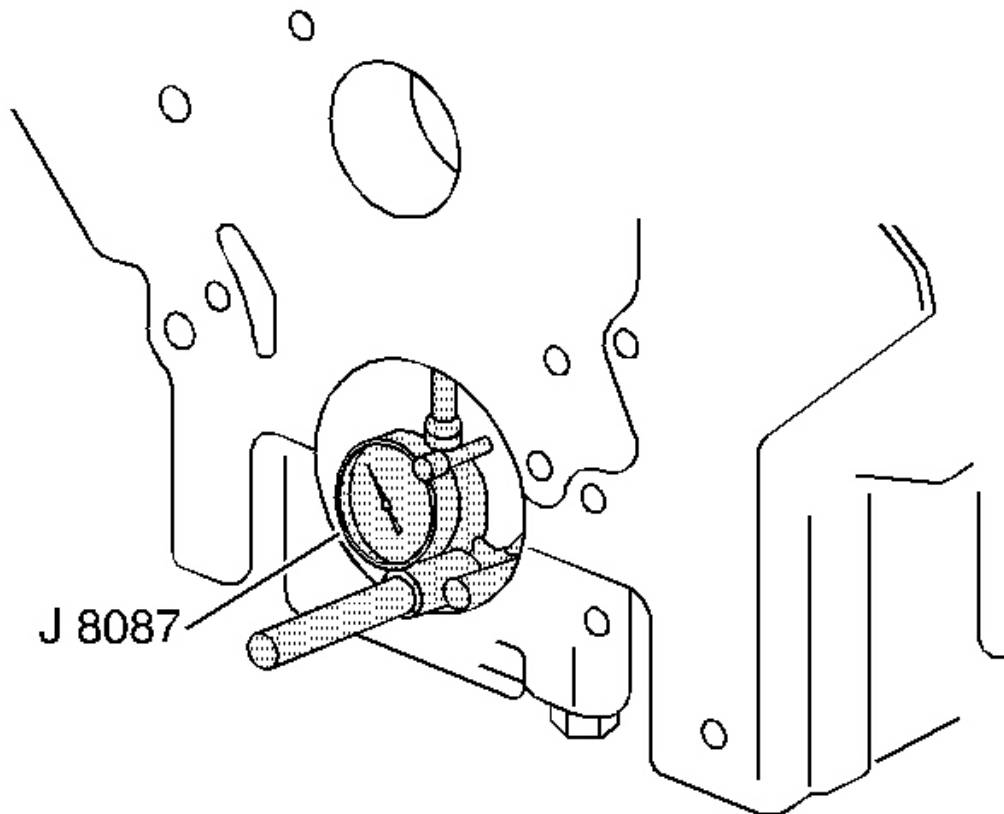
Measuring Bearing Bore For Taper & Out-Of-Round
